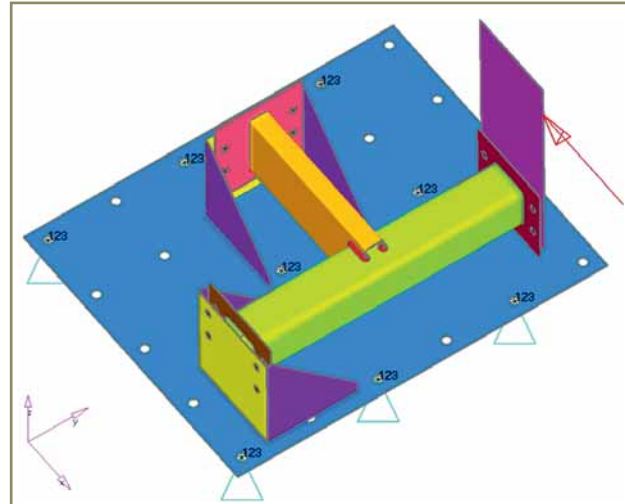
Solid model of the welded joint- configuration of support points and the location of the loading force
